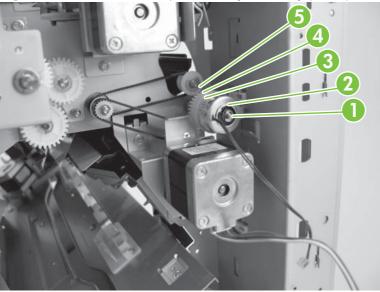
Remove the operation-tray assembly (5 of 6)
